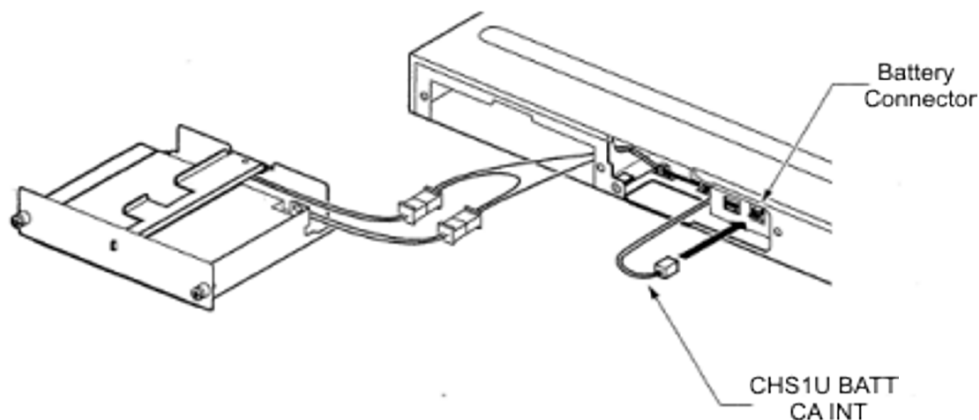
Connect CHS1U BATT CA INT BATT Cable to PSU Battery Connection
